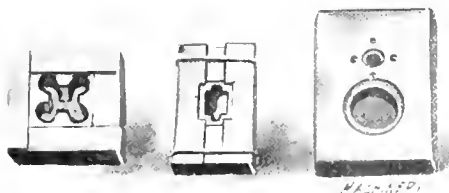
Square Threading Die, and Press Dies with Covers ready for Hardening
